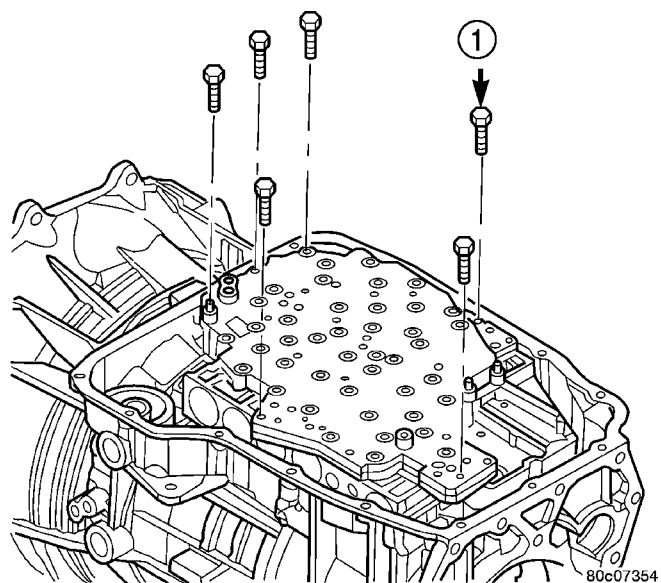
Solenoid and Pressure Switch Assembly Screws
